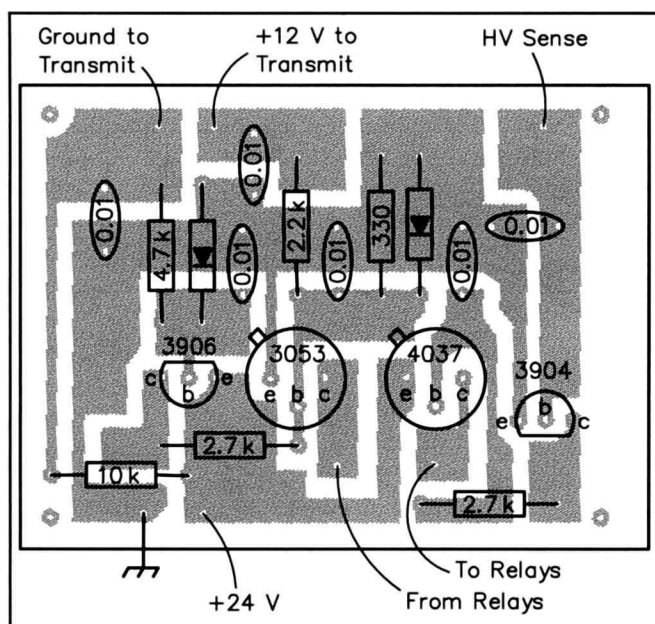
TR switching PC board, component side. While board layout is not especially critical, the board itself must be 1.75 X 3.25 in. or smaller in size.
